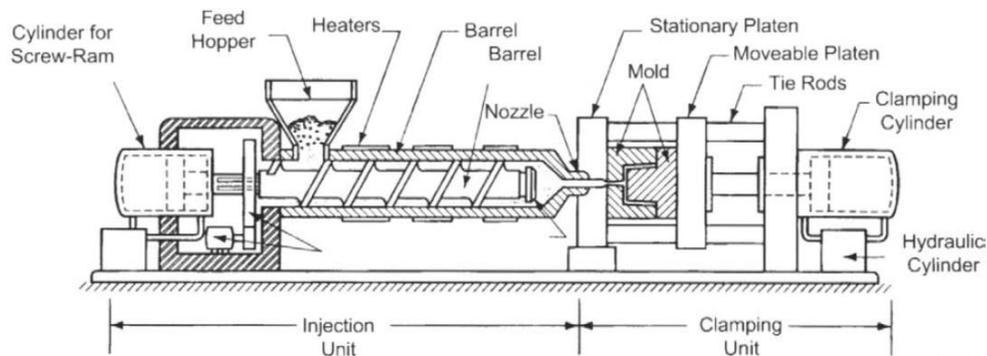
Injection moulding machine (Campbell, 2004a, p. 424)
